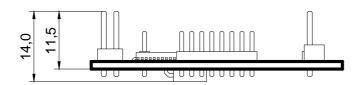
Dimensions of the ID CPR.M02 Reader Module
